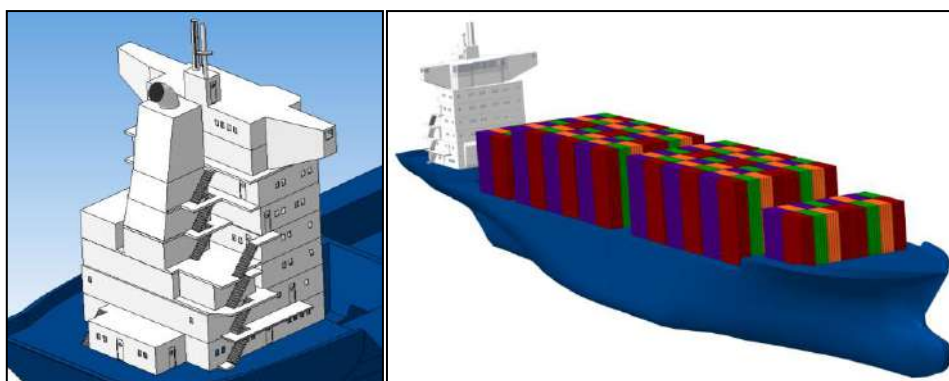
Creating a 3D assembly model of the MSC Panaya Drawings
